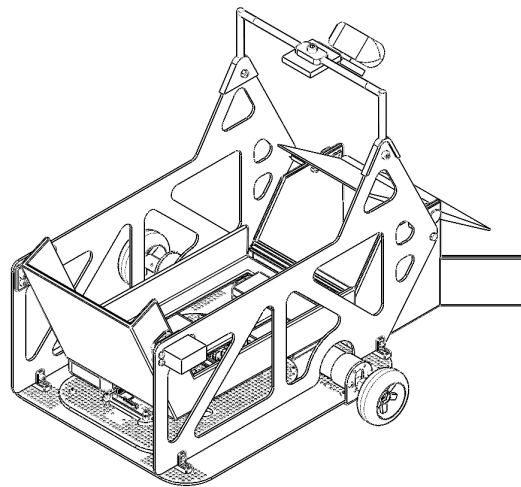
Fully assembled bot and its mechanisms - [Engineering Drawing](#)
